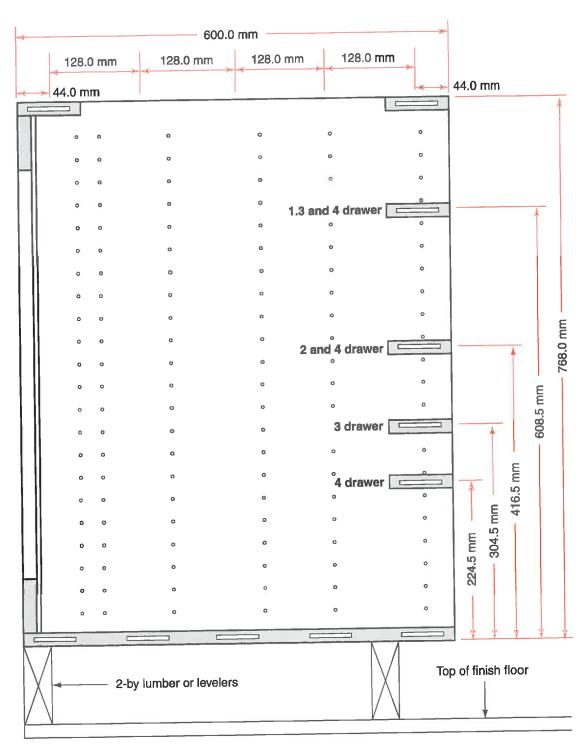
This illustration shows the plate kerf pattern for a 1, 2, 3, or 4 drawer base cabinet side panels. Other than the front row, not all 5 mm System holes need to be drilled. (*Chuck Davis Cabinets*)
